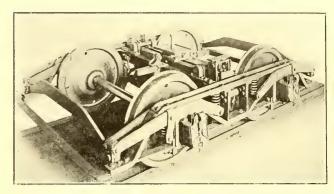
NEW DESIGN OF TRUCK FOR OUTSIDE HUNG MOTORS; CENTER PIN LyAD, 17,000 LB.; WHEEL BASE, 54 IN.
